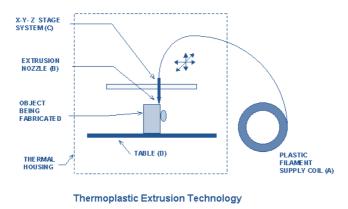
Fused Deposition Modelling method Courtesy of www.additive3d.com
